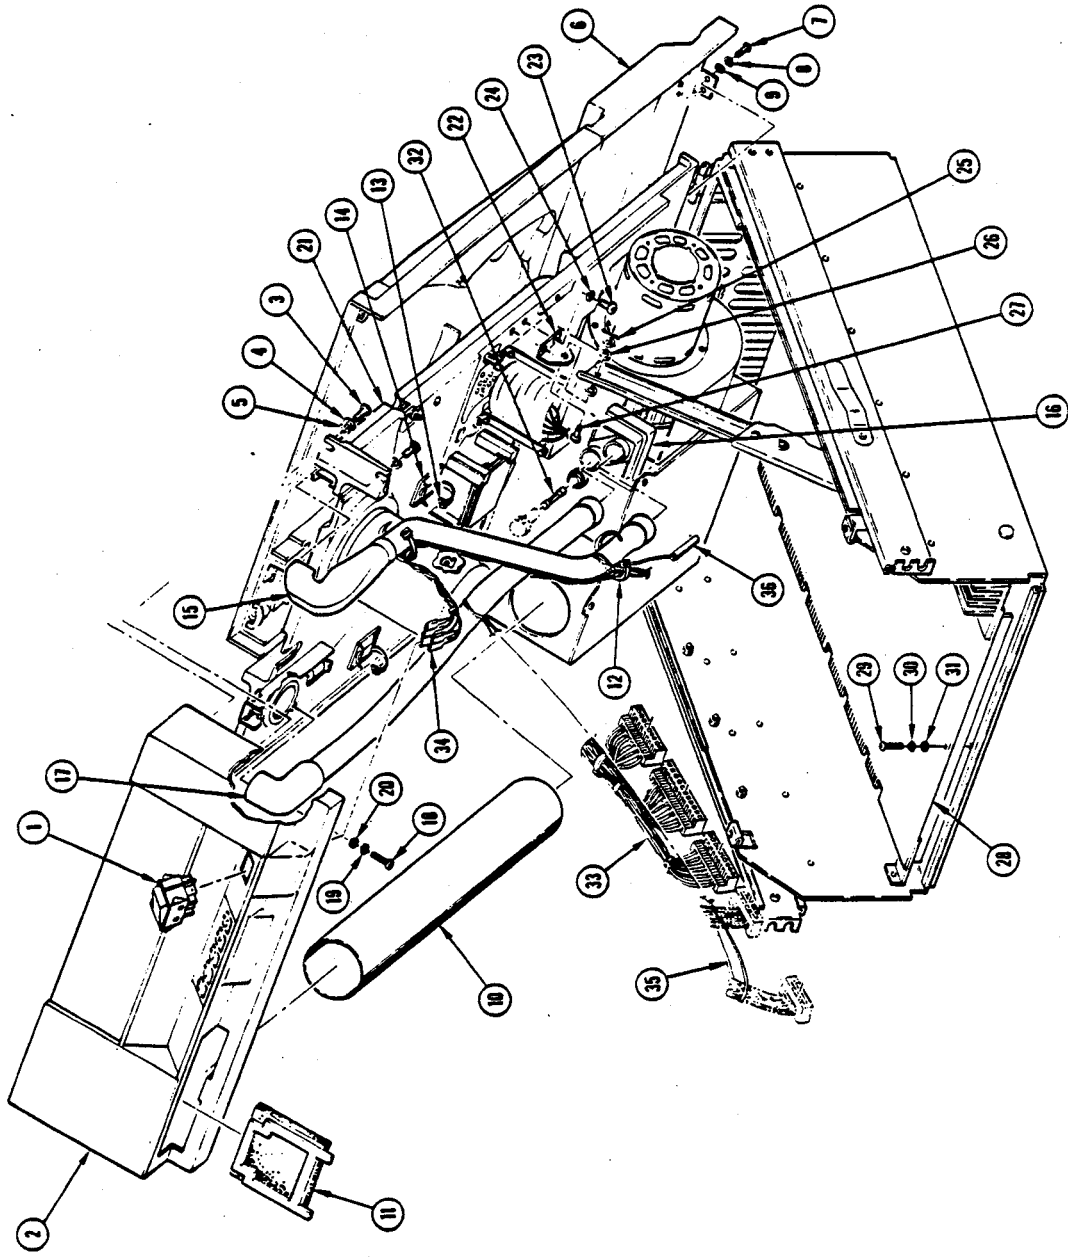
Model F880 Magnetic Tape Streamer Unit (Exploded View)
